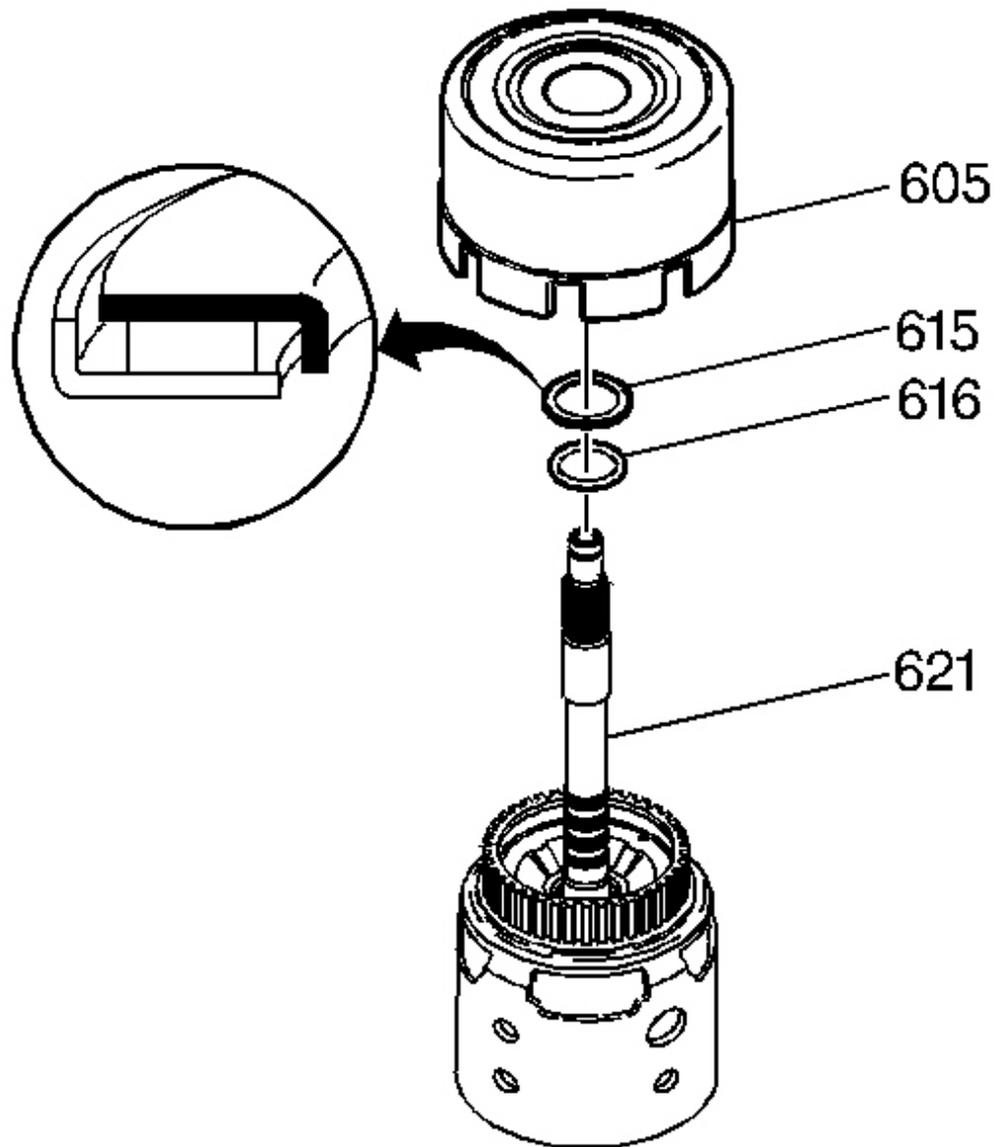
Selective Thrust Washer, Stator Shaft/Selective Washer Bearing Assembly & Input Housing
